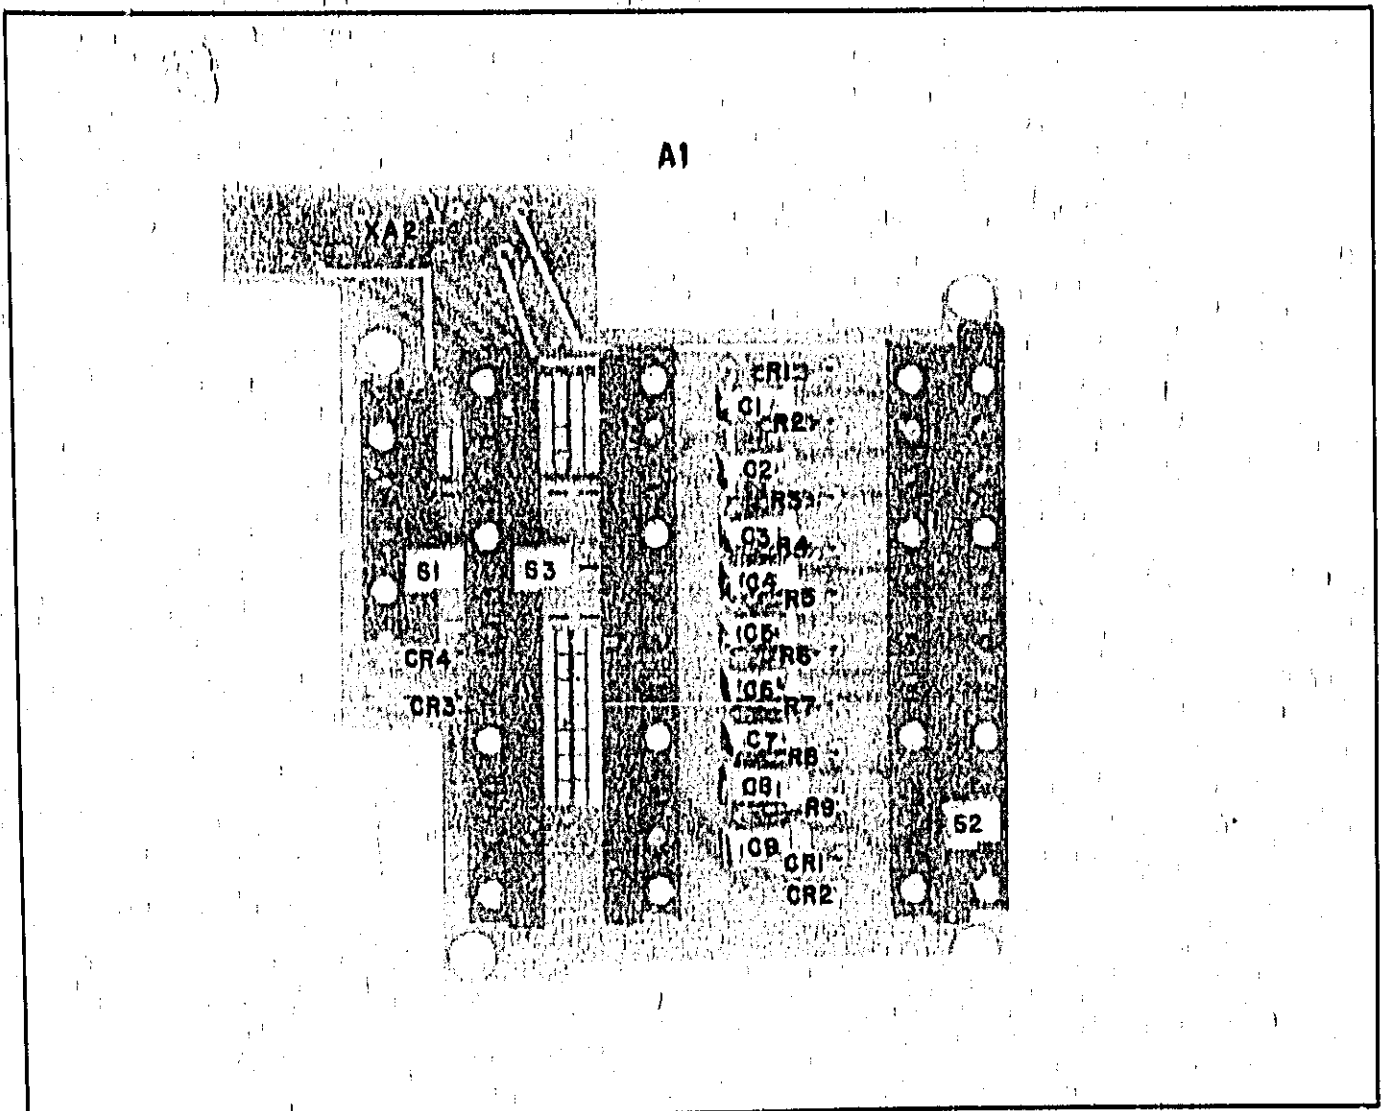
Parts Location for Front Panel Assembly A1 and A2 (1 of 2)
